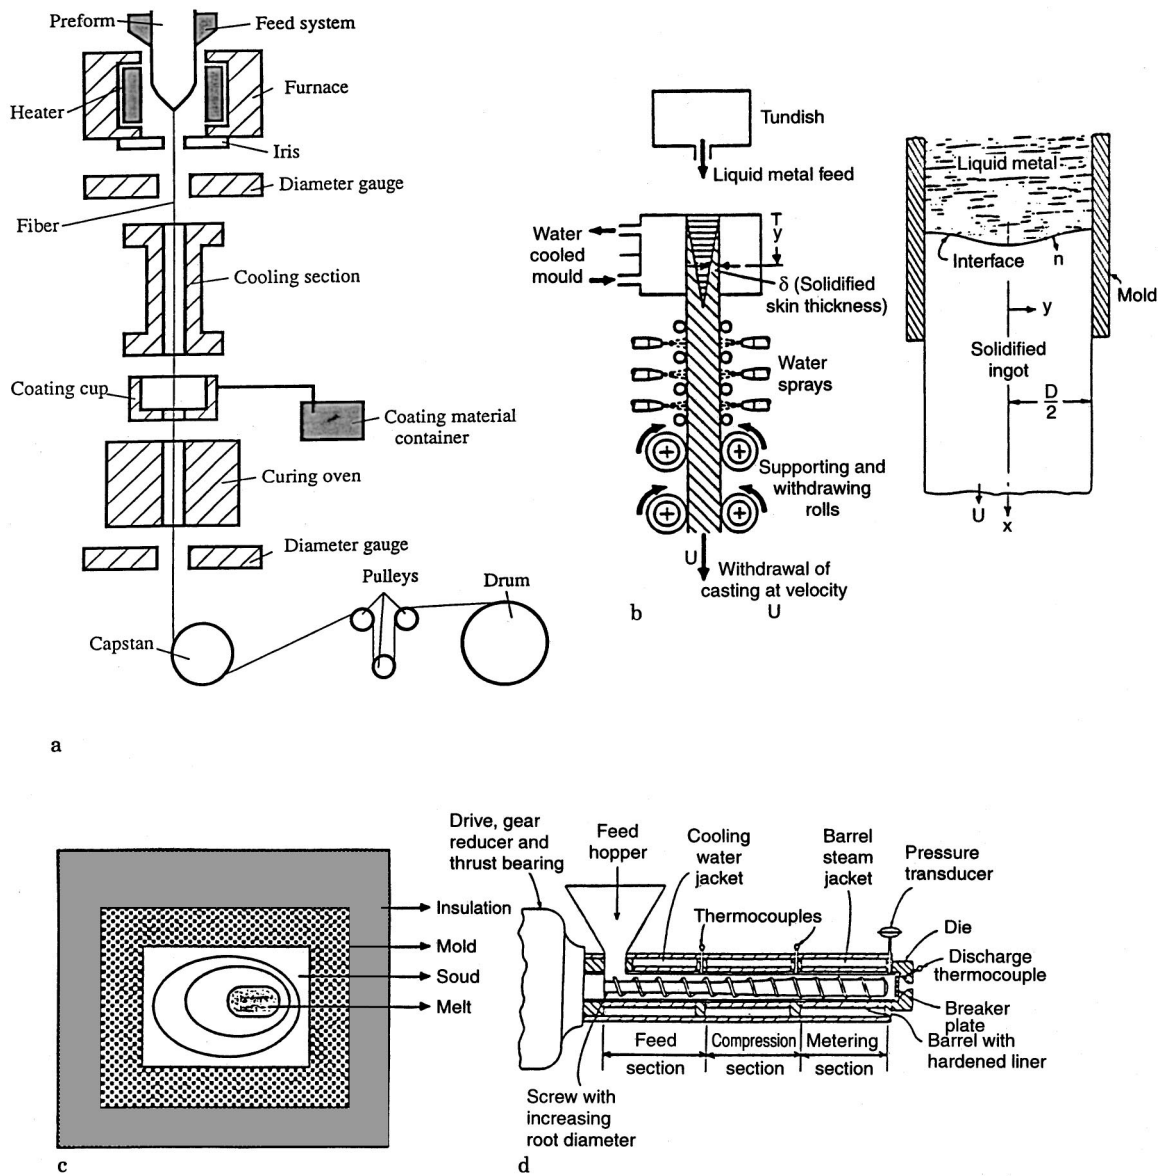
Sketches of a few common manufacturing processes that involve the flow of the material being processed. (a) optical fiber drawing; (b) continuous casting; (c) mold casting; (d) plastic screw extrusion
